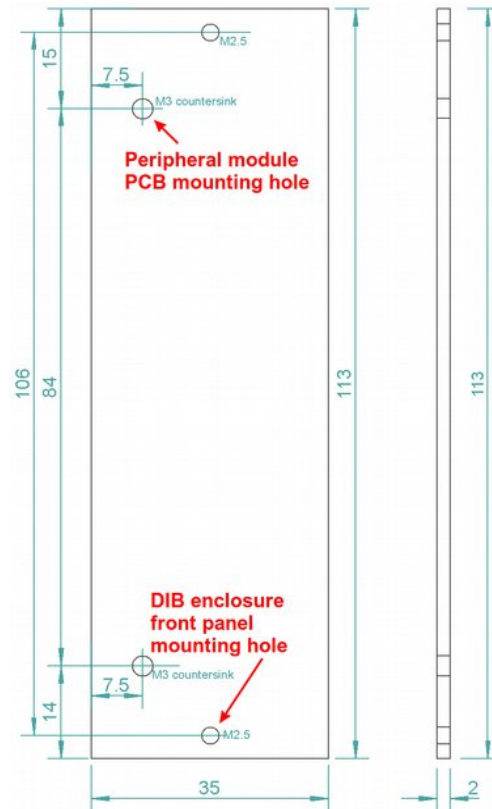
DIB v1.2 Peripheral module front panel dimension
